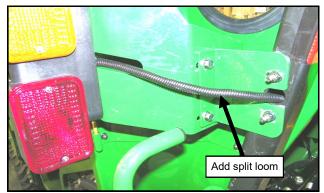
(Assemble OEM Side Lights to Cab)
